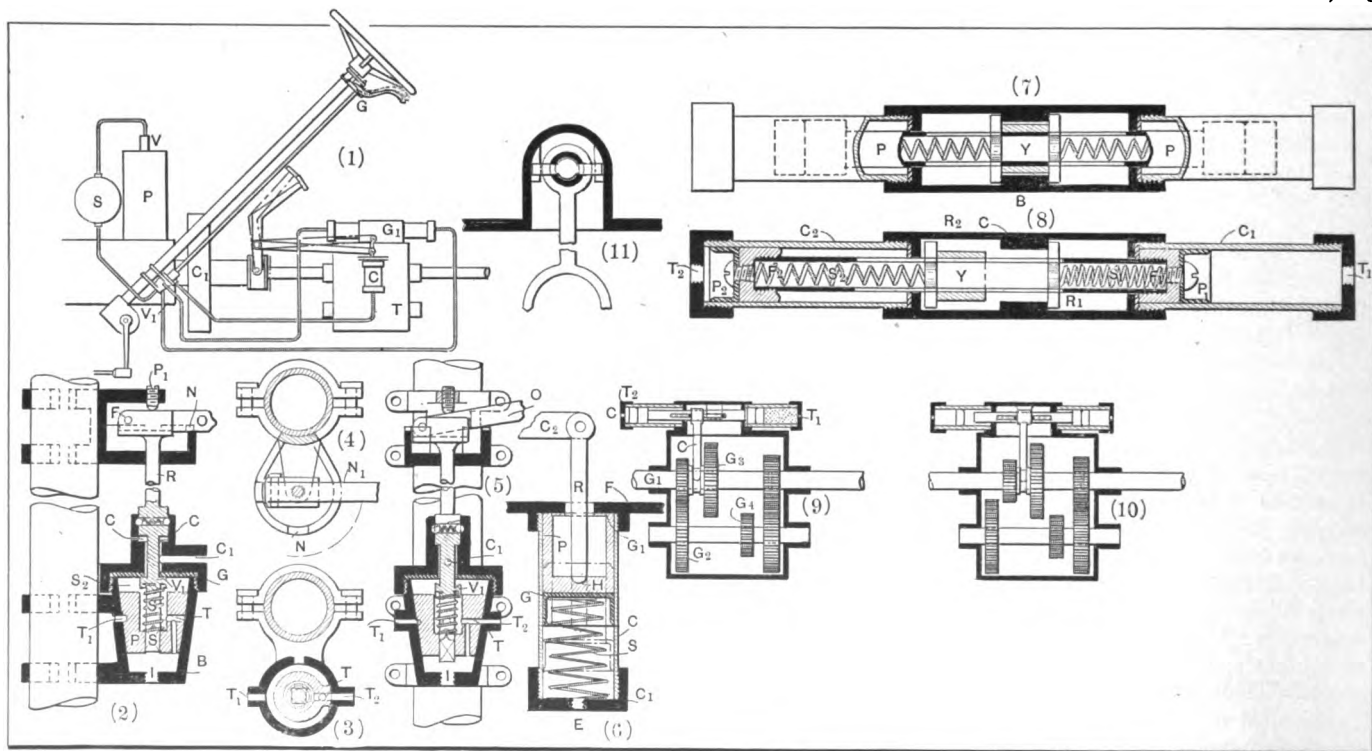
General arrangement of Irish gear. Fig. 2—Method of attaching distributing valve to steering post. Fig. 3—Section through valve and post. Fig. 4—Operating lever and notches. Fig. 5—Lifting lever for shifting the gears. Fig. 6—Clutch operating mechanism. Fig. 7—Gear operating mechanism when gears are in normal. Fig. 8—Shifting gears by admission of gas through T. Fig. 9—How mechanism operates transmission gears. Fig. 10—Gears in neutral
